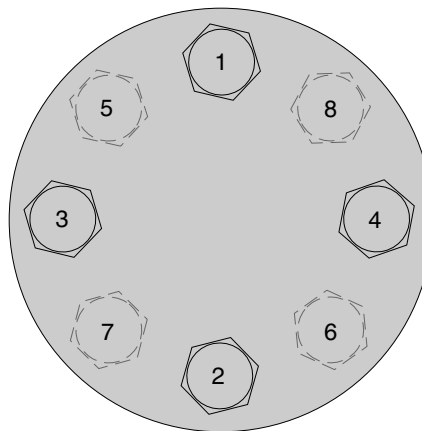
BOLTING SEQUENCE FOR 4 AND 8 BOLT FLANGES
